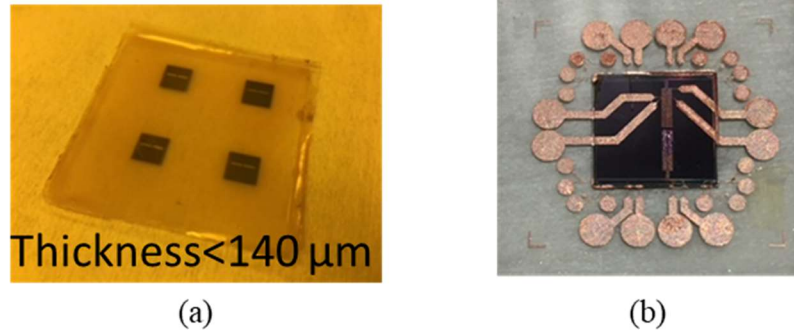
Ultra-thin GPE package: (a) after carrier removal, (b) after RDL process
